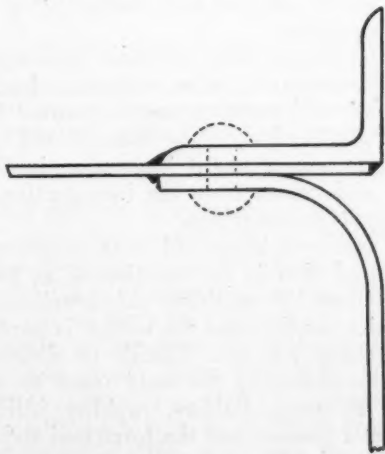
A section through the lower sill of a gondola car showing how welding was used to eliminate the rivets
